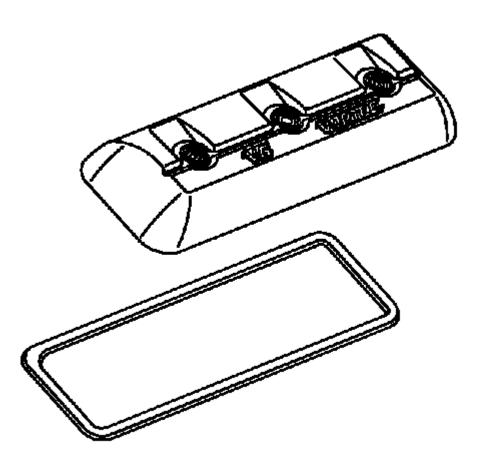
View Of Rocker Arm Cover And Gasket Courtesy of GENERAL MOTORS CORP.
